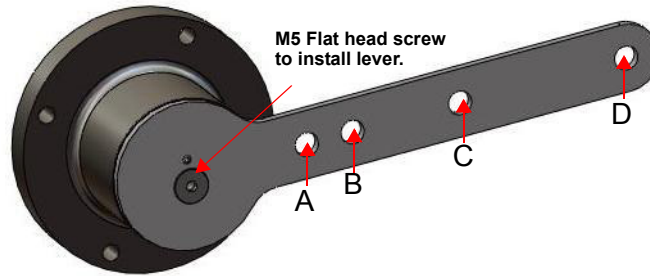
Magnet Holder and Standard Lever for Reciprocating Valves
